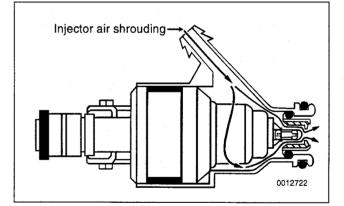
Cutaway view of fuel injector used on M42 or M44 engine.
